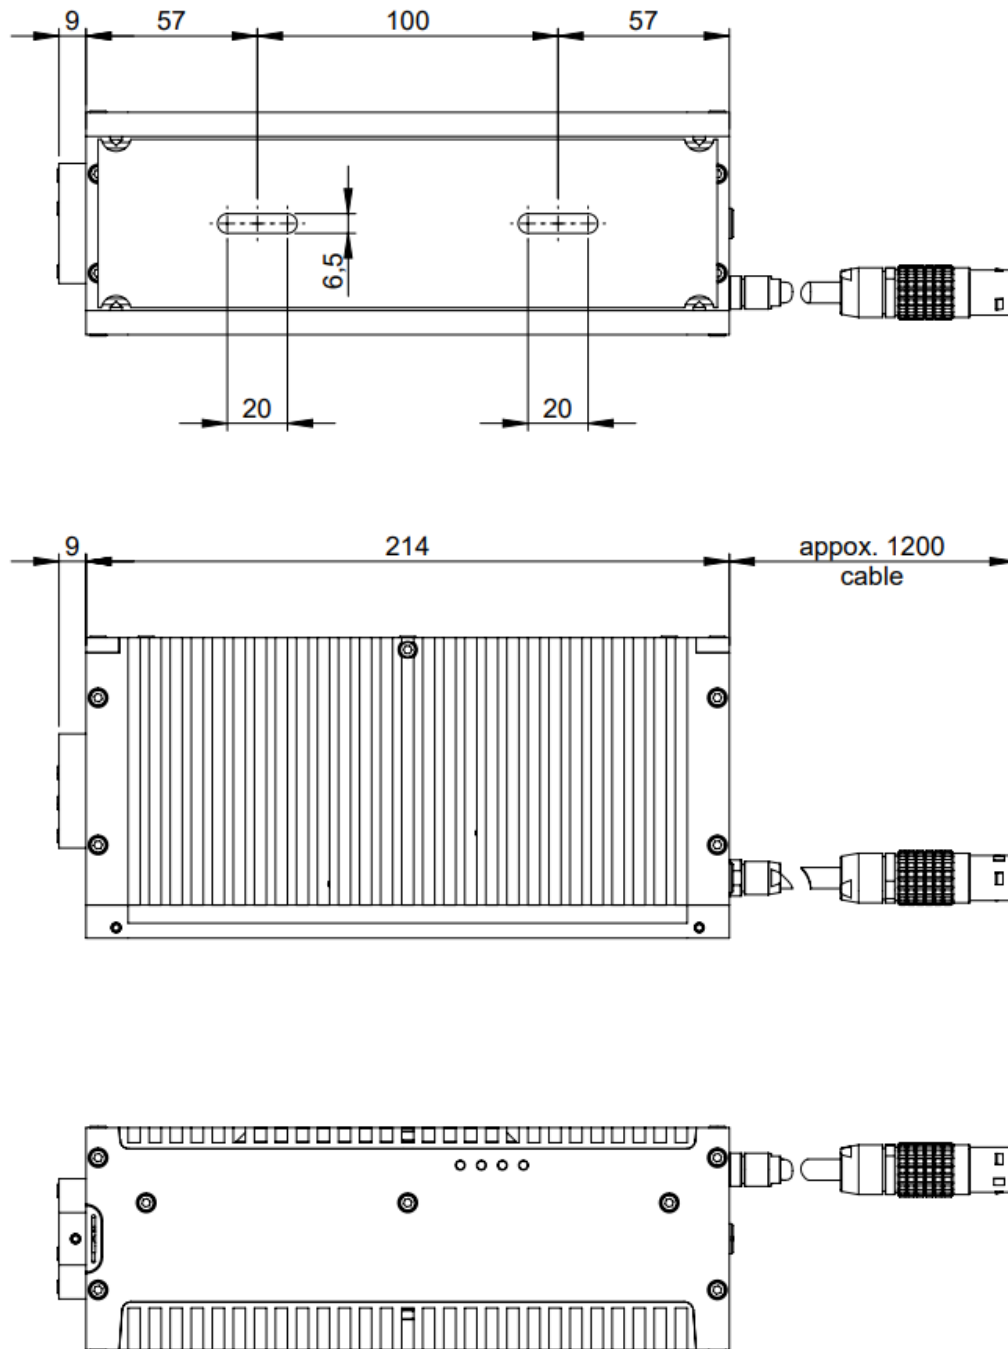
Dimensions of an freespace LDH-FA laser head with bulk housing
